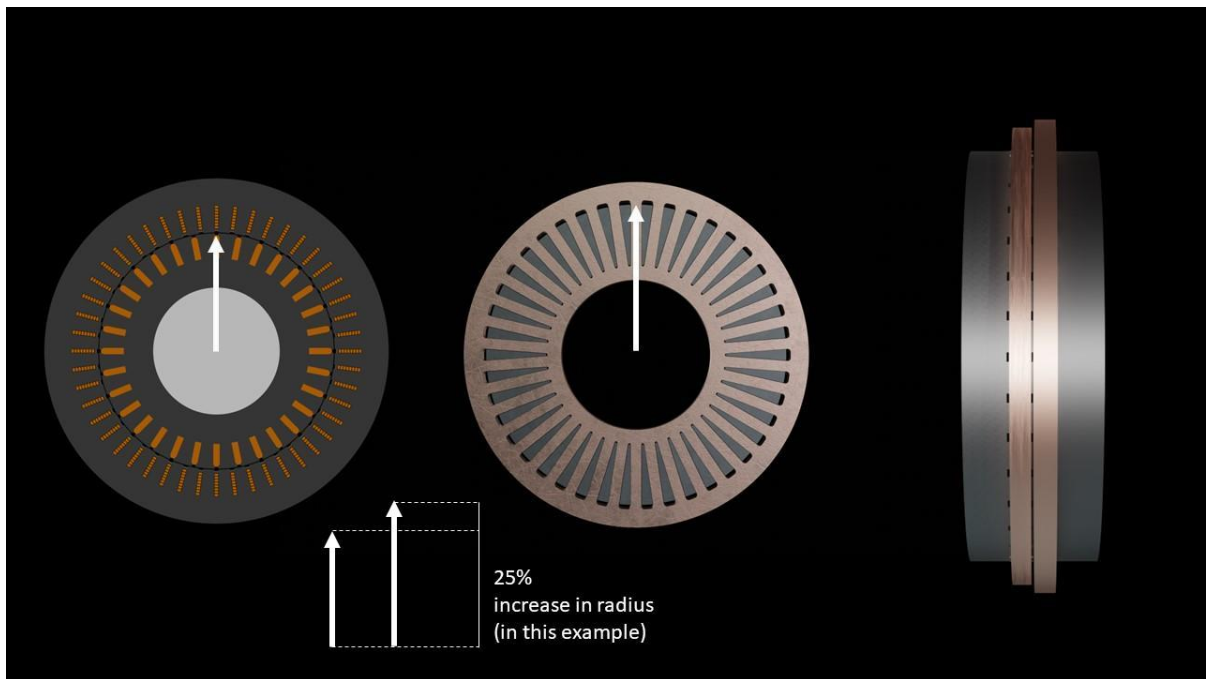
from left to right, section view of a conventional radial flux machine, frontal view of our axial flux rotor, side view of our axial flux motor
